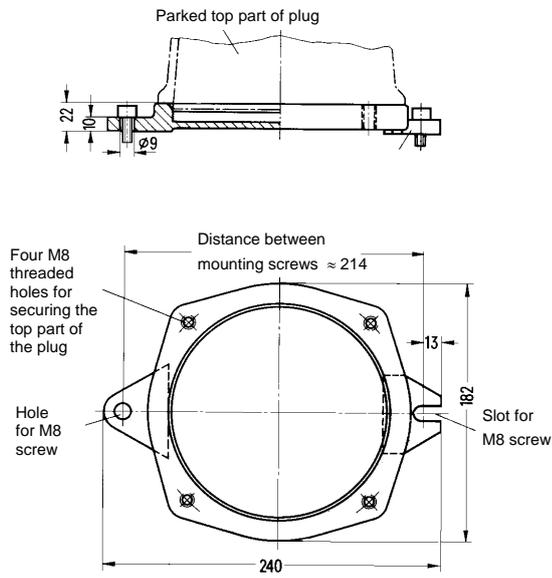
Parking socket for protecting and securing the removed top part of the plug
